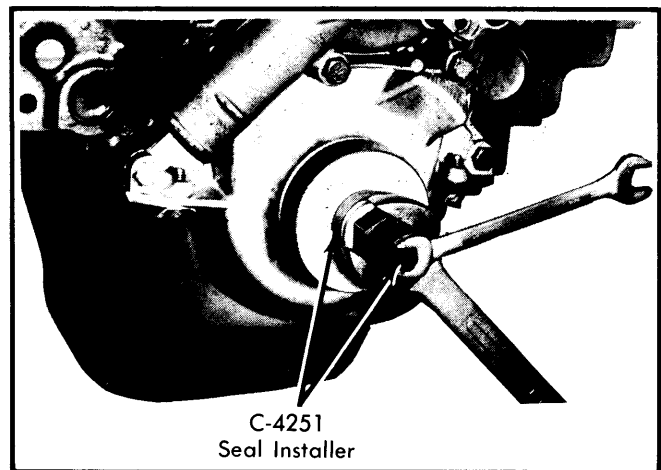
Using Tool C-4251 to Install Front Cover Oil Seal
